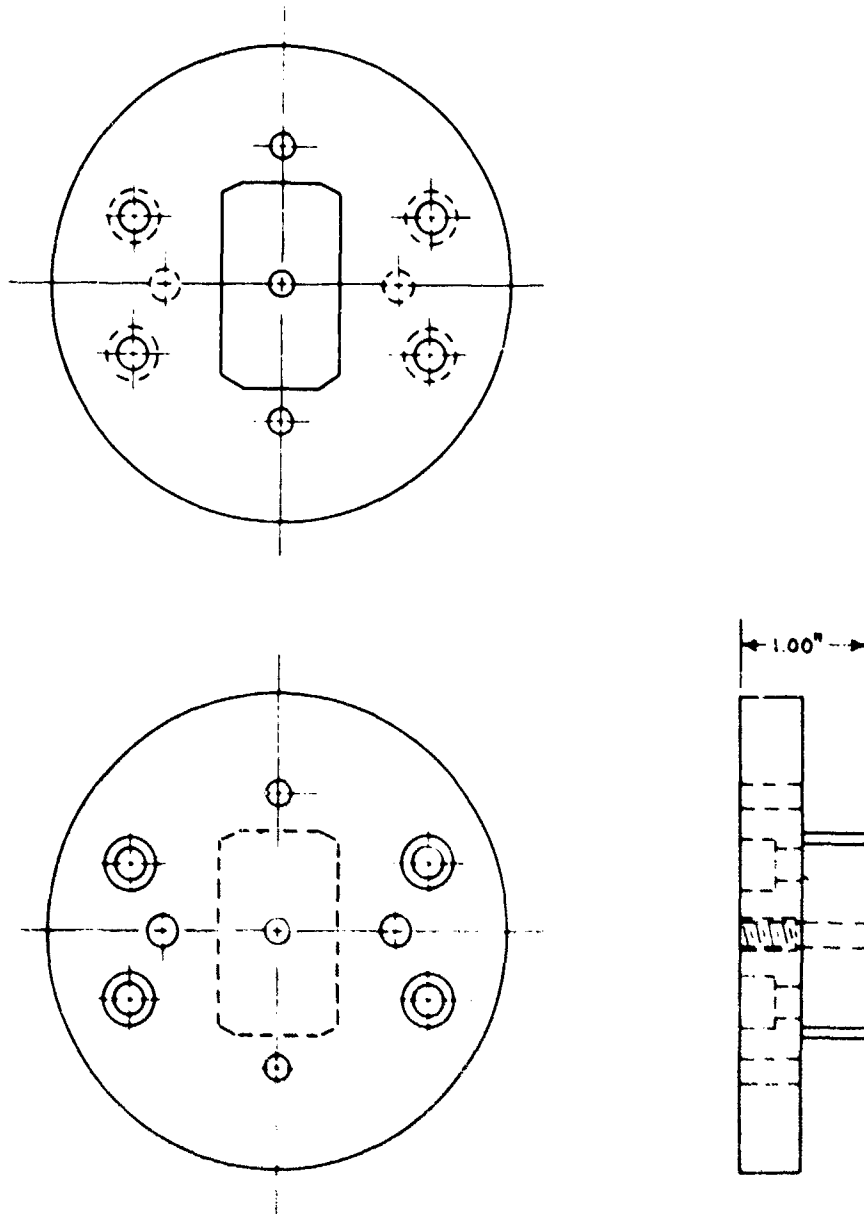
WORKING DRAWING OF BOTTOM OF SLIDE WIRE GAGE
